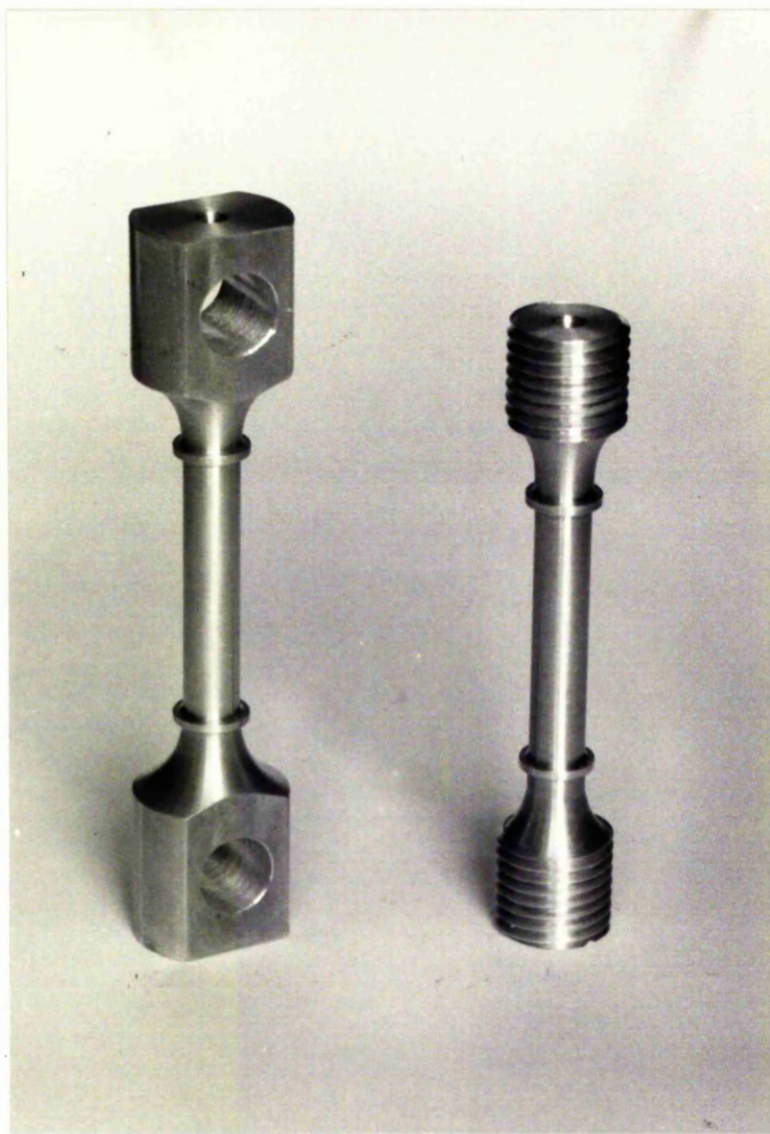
Universal Joint Test Piece (left) and Screw Grip Test Piece (right).
